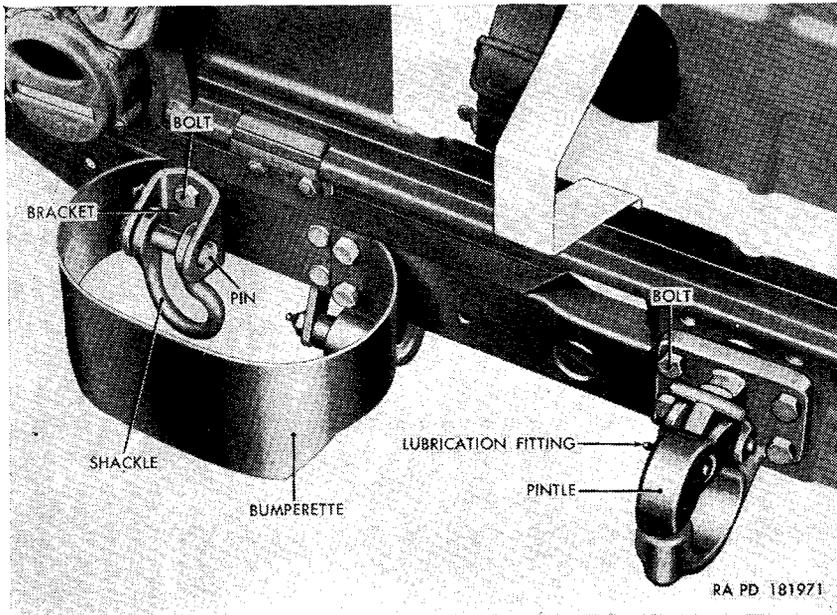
Left rear lifting shackle, bumperette, and towing pintle—installed.
